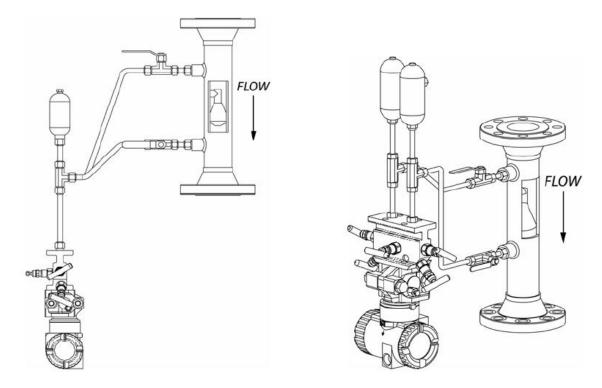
Piping installation for downward flow through a vertical meter with wall taps
